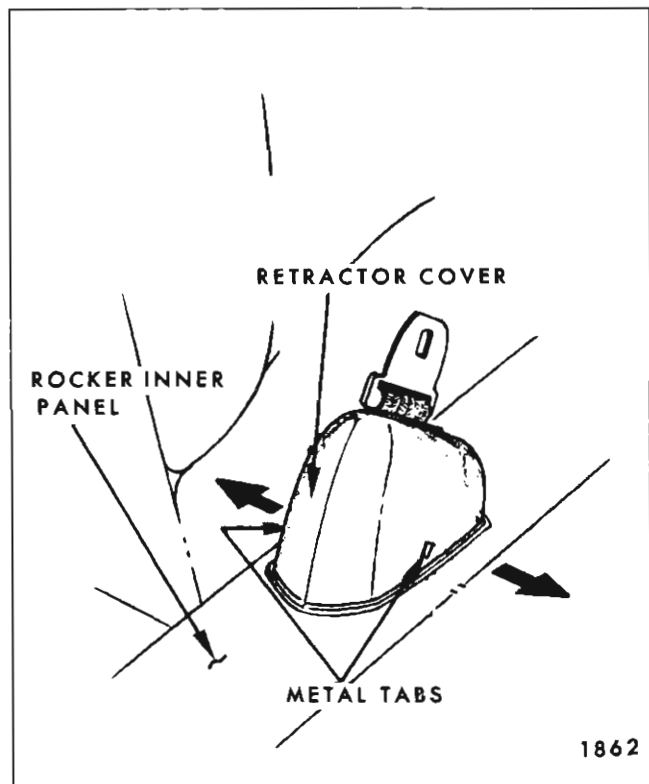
H47—Removal of Seat Belt Retractor Cover - All except 15000 - 16000 Series
